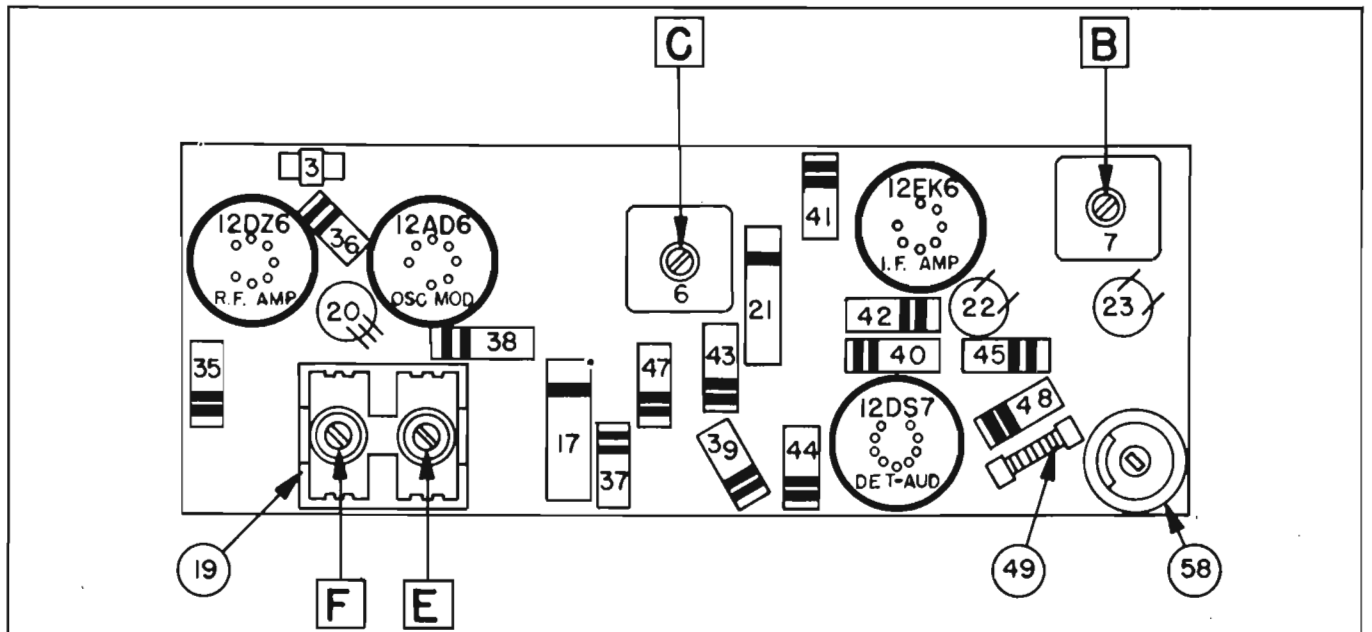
PARTS LAYOUT ON CIRCUIT BOARD - 988336 - RADIO
